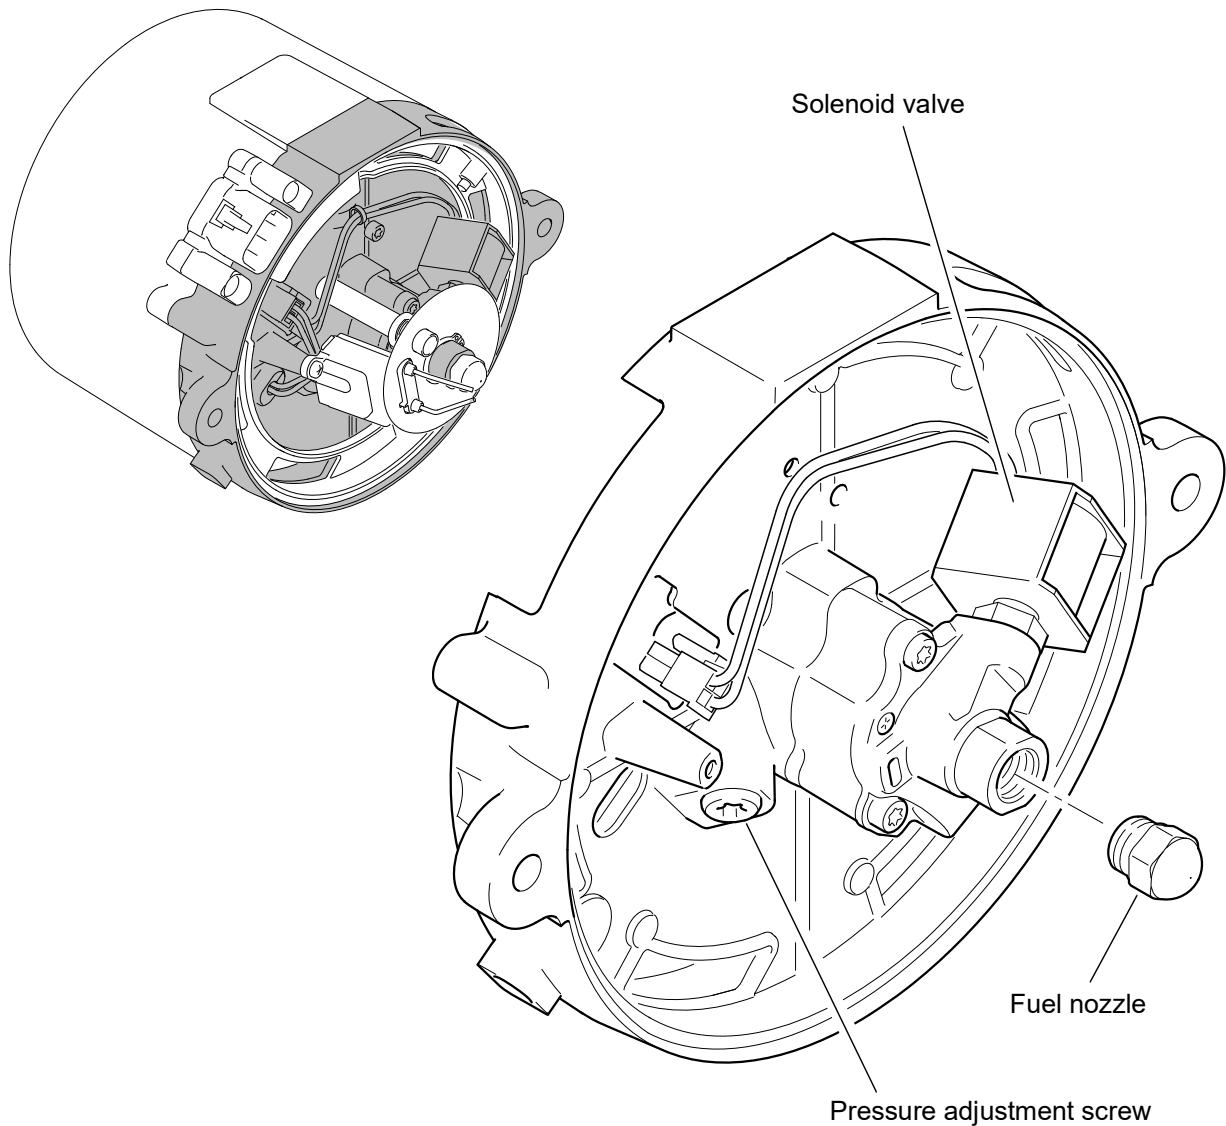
Fuel pump with solenoid valve and fuel nozzle
